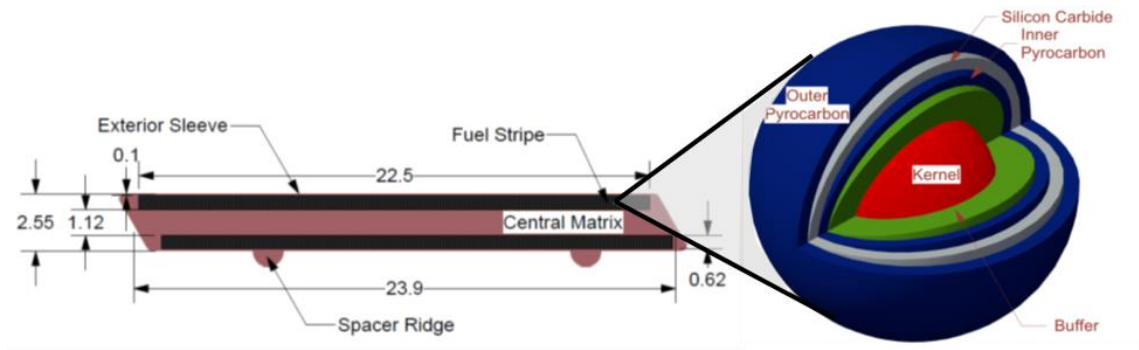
Fuel plank 2011 design cross-section with dimensions shown in cm [13].
